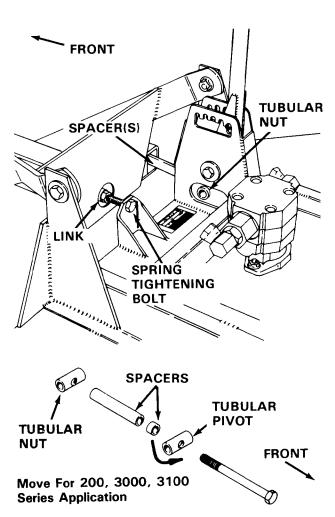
Illustrated for 400, 4000, 4100 Series
